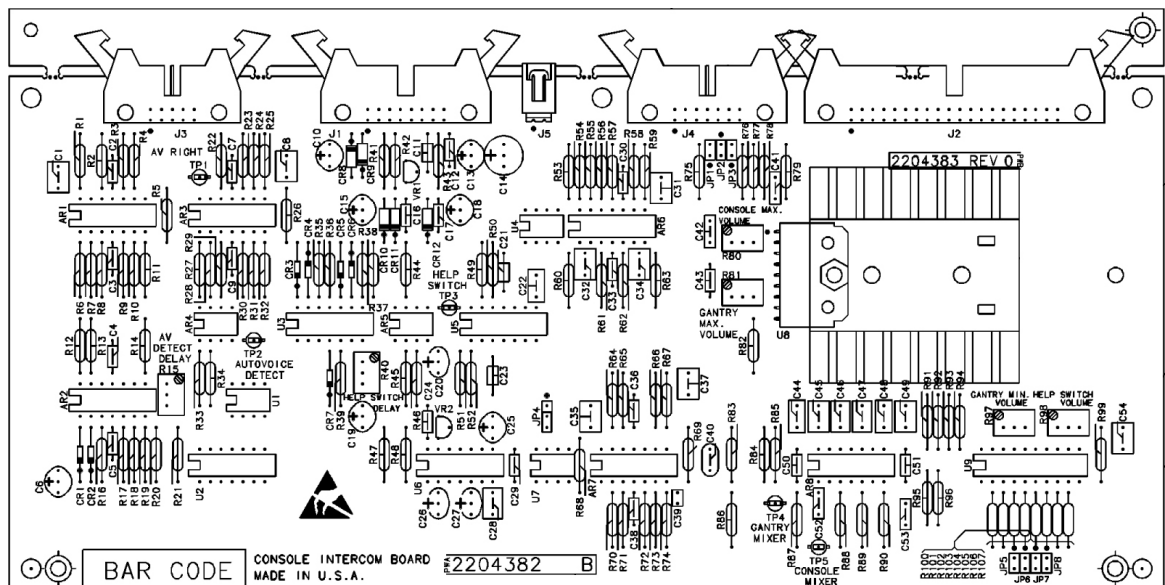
Console Intercom Board (2204382) Physical Layout
